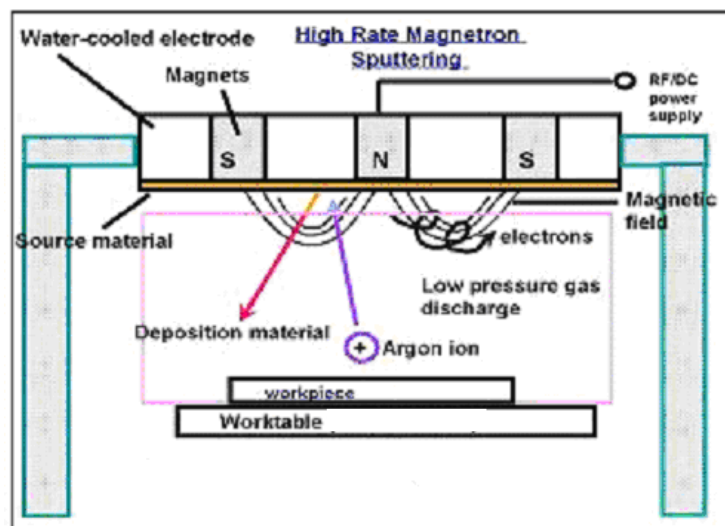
Sectional view through coater vacuum chamber⁽¹³⁴⁾
